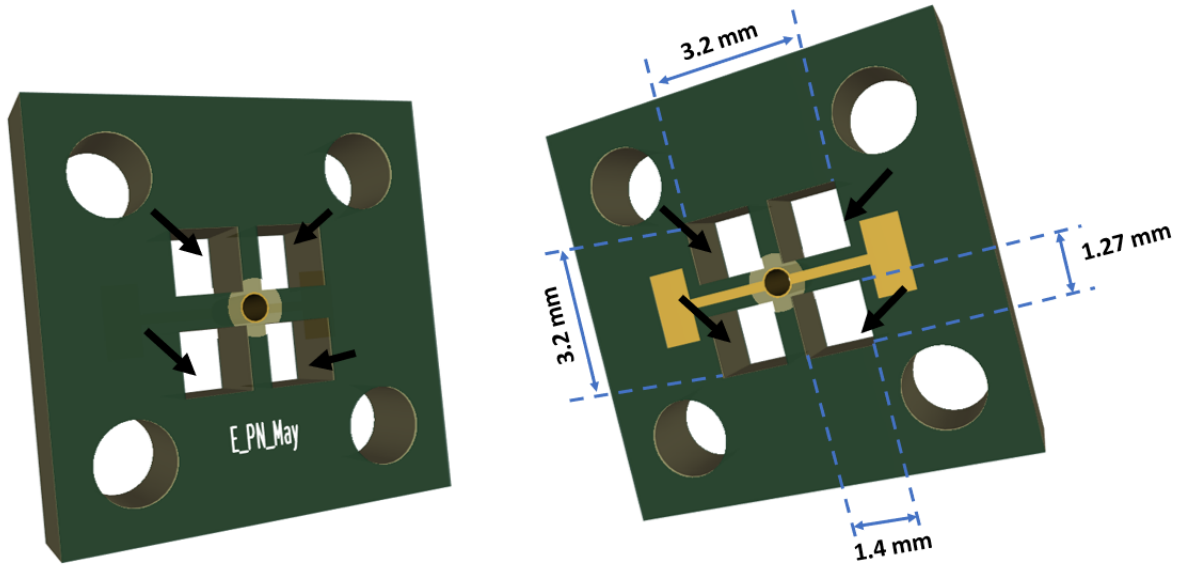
Emitter PCB: Front and backside (with metal pads) are shown, and inlet holes are shown with black arrows.
